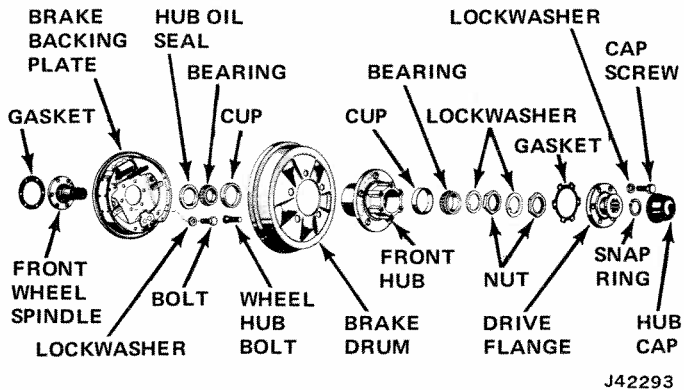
Front Wheel Attaching Parts, CJ Models
